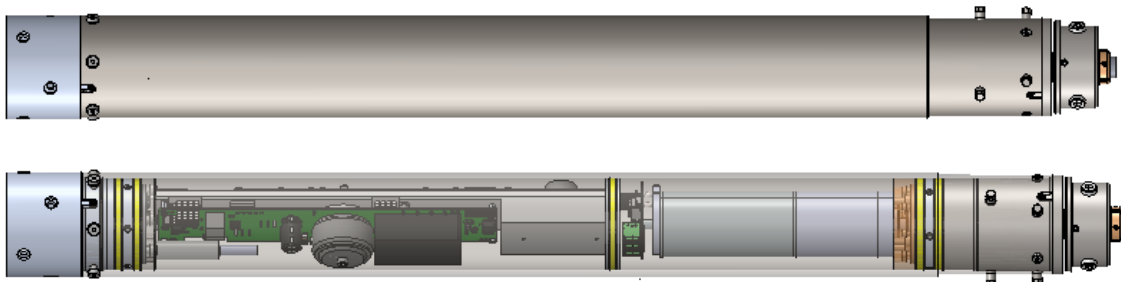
Motor section. The lower view has a transparent outer tube to show the internal components.
